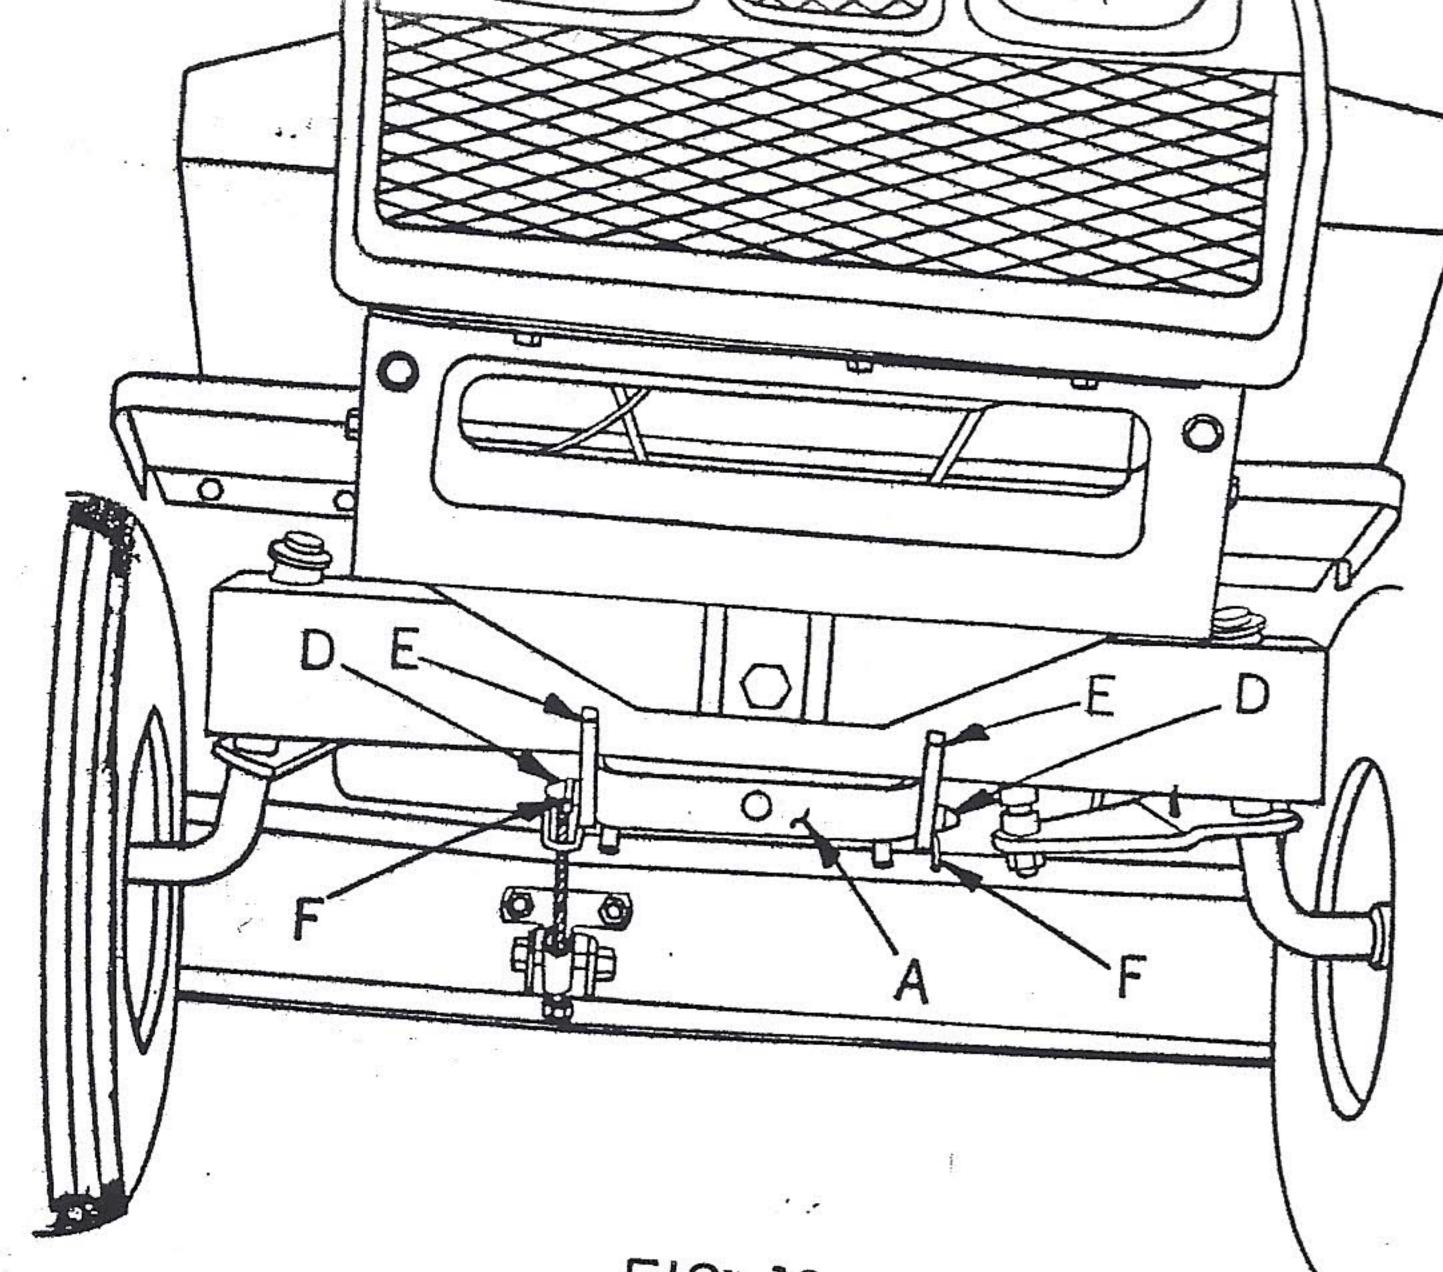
4. Raise front lift link (A) up until round head rivets (D) can be inserted through holes in front lift link (A) and tractor front hanger brackets (E).
